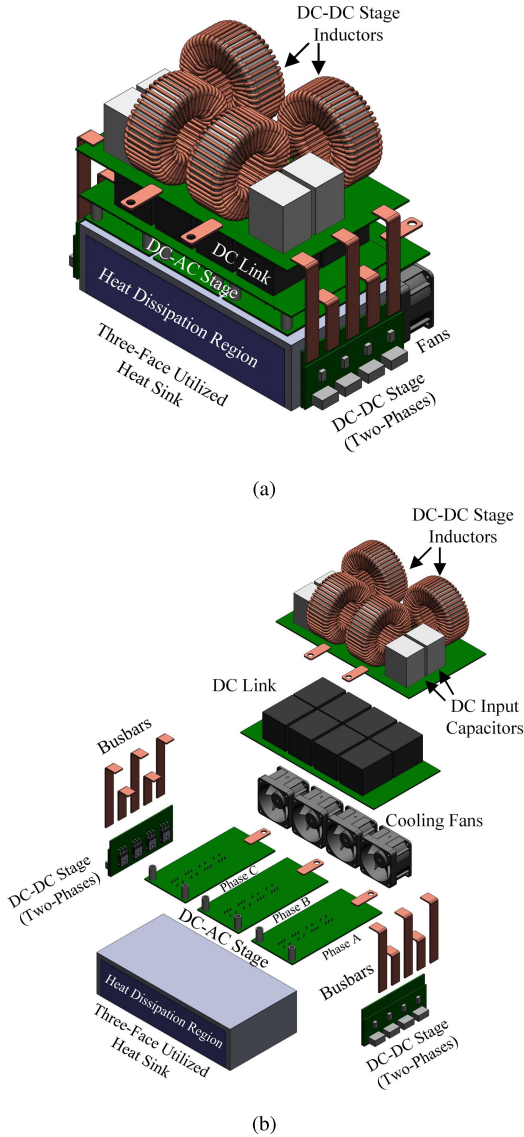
3-D converter-level packaging conceptual layout. (a) Trimetric view. (b) Exploded view.
